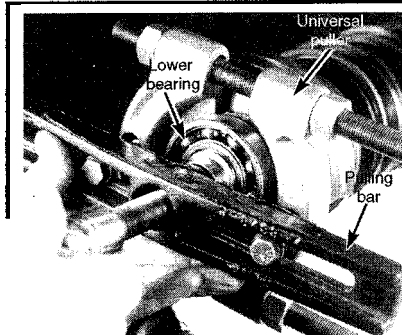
then use a puller or a bearing separator (depending on the model) to remove it from the crankshaft
